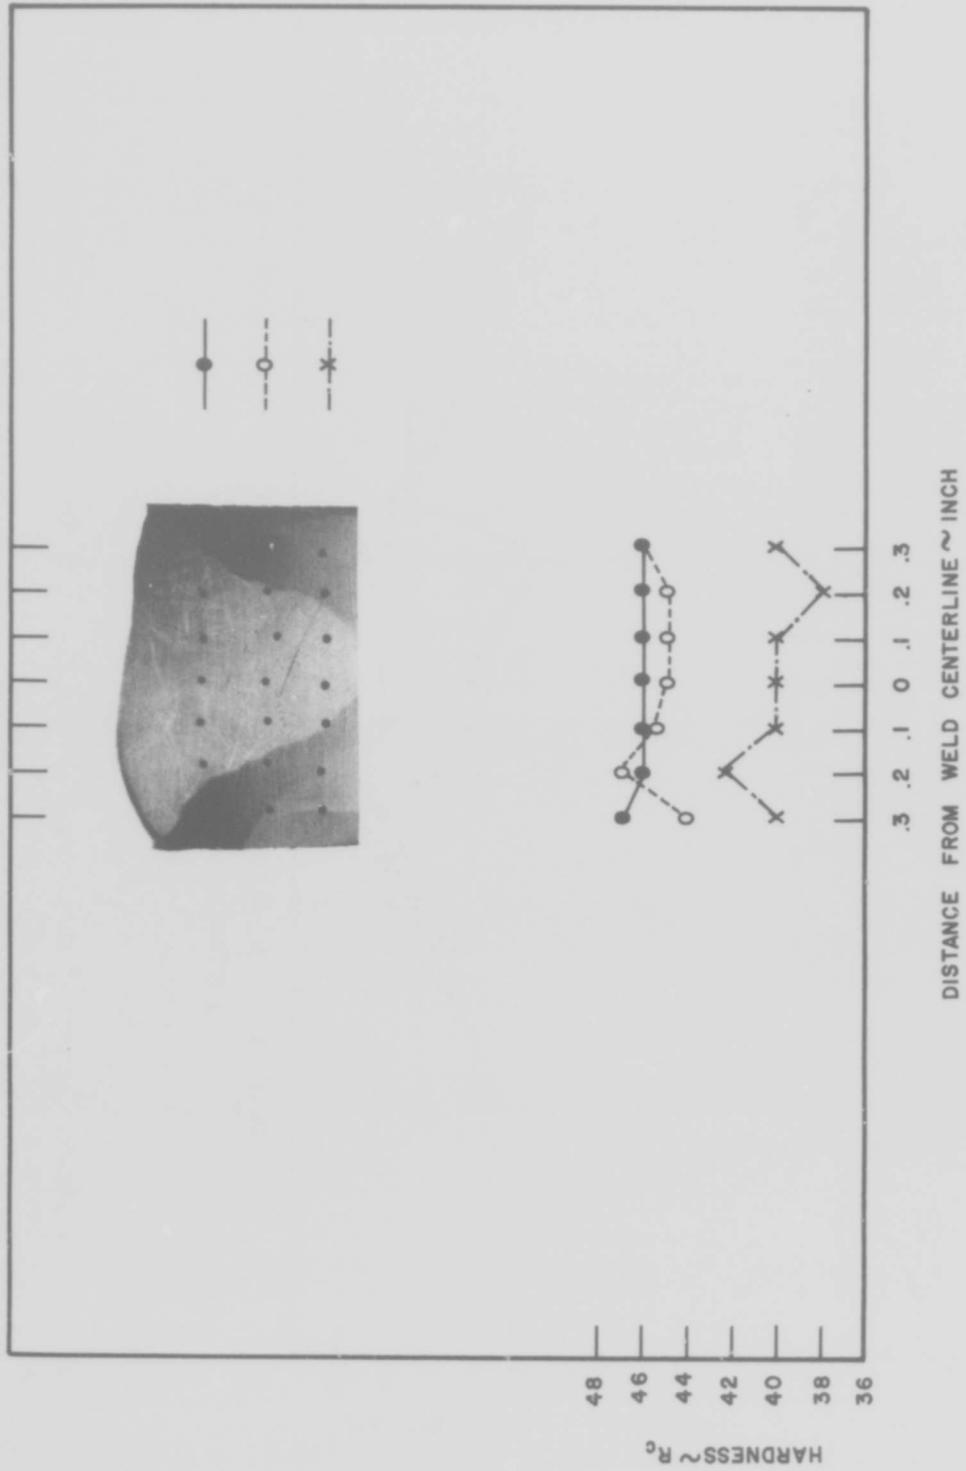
Hardness Survey of Multipass TIG Weld No. 0260 Made in HP 9-4-45 1/2-Inch Plate Using a Pre- and Post-Heat of 500°F.
